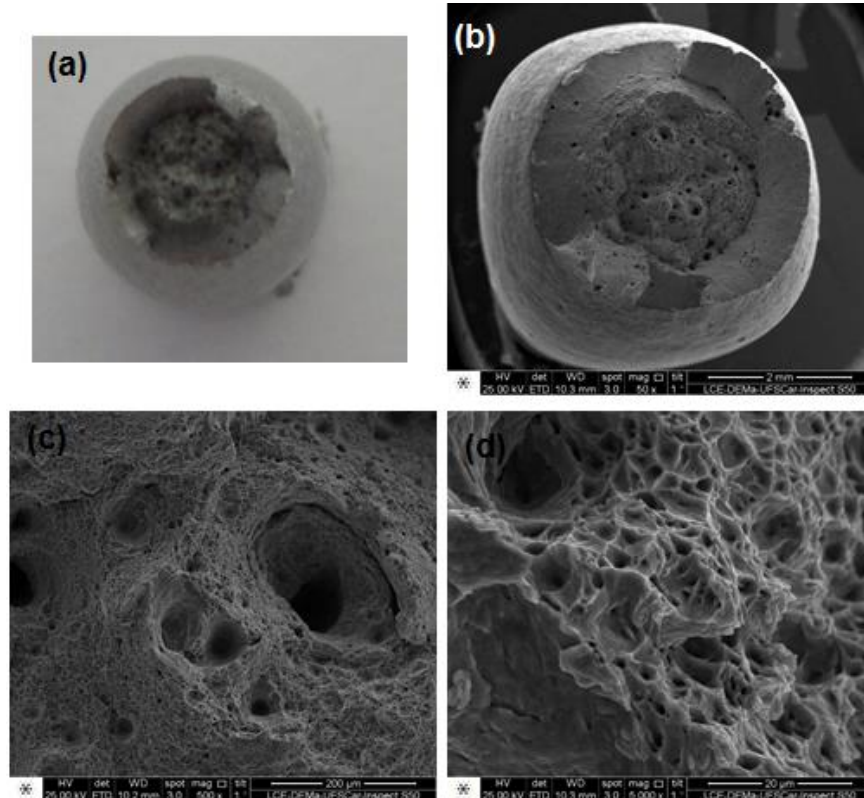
(a) Photography and (b) SEM image of the cup-and-cone fracture (specimen 4) of the as-spray formed SMSS. (c) and (d) dimpled fracture surface.
